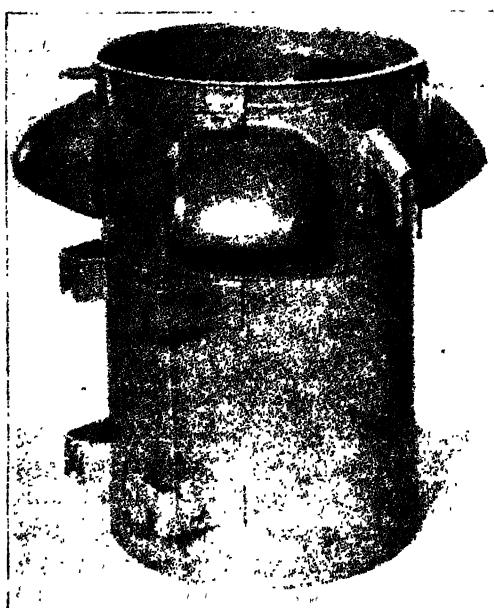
Distribution transformer tank completely fabricated with resistance welding.
